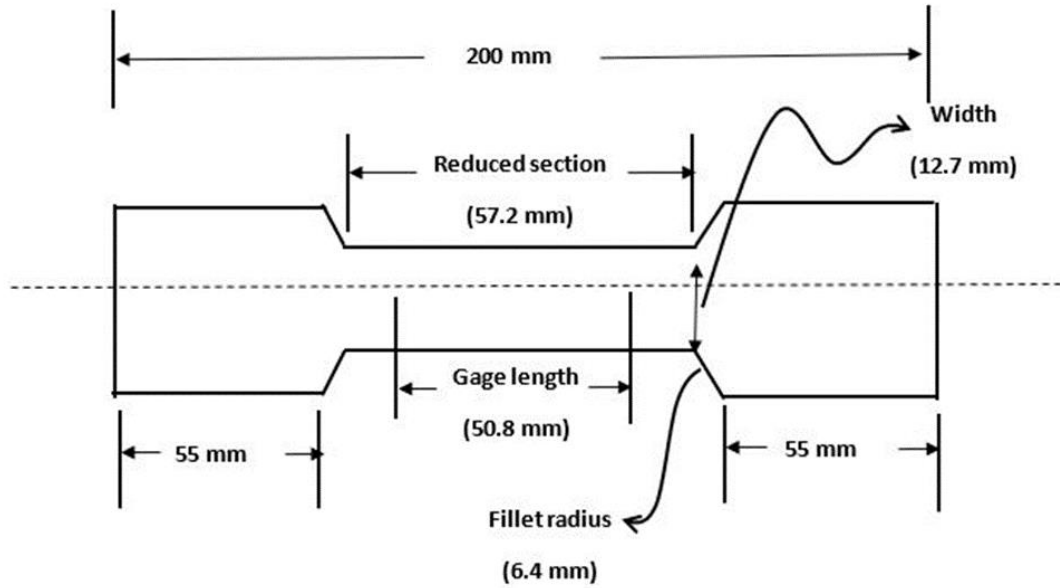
2 ASTM E8 standard dimensions and geometry of a flat tensile specimen [94].
